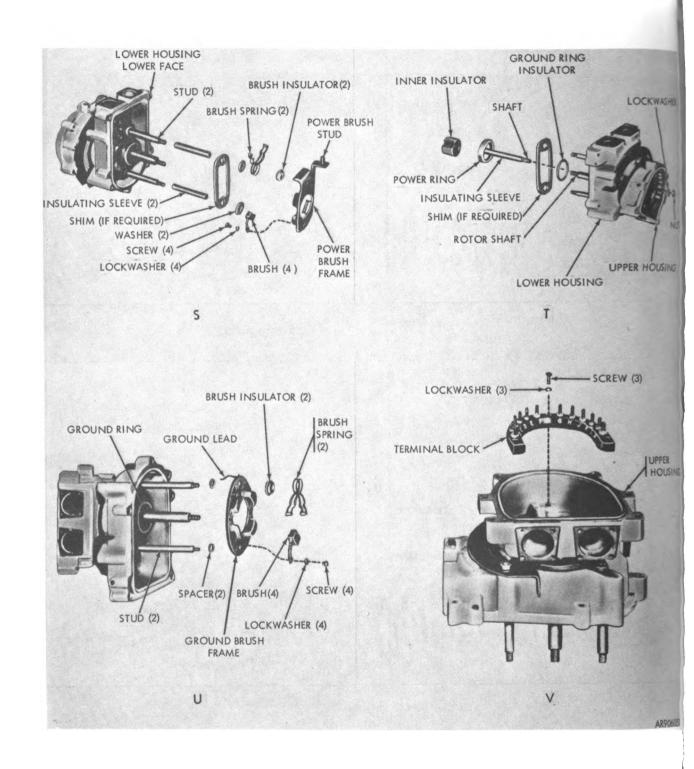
Slipring box disassembly or assembly (6 of 7).
